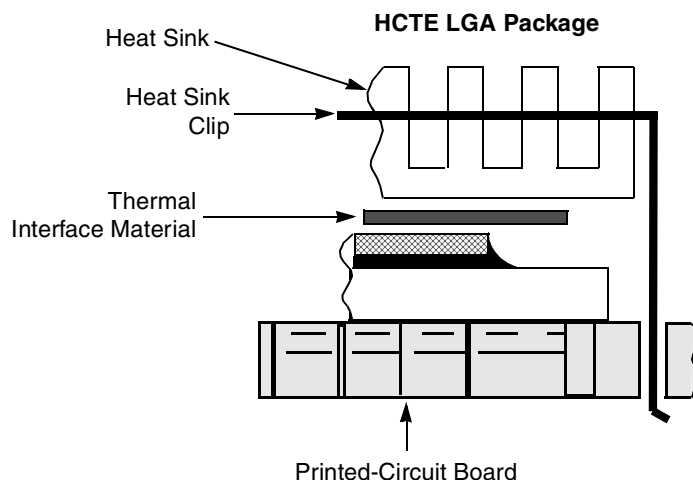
LGA Package Exploded Cross-Sectional View with Several Heat Sink Options
